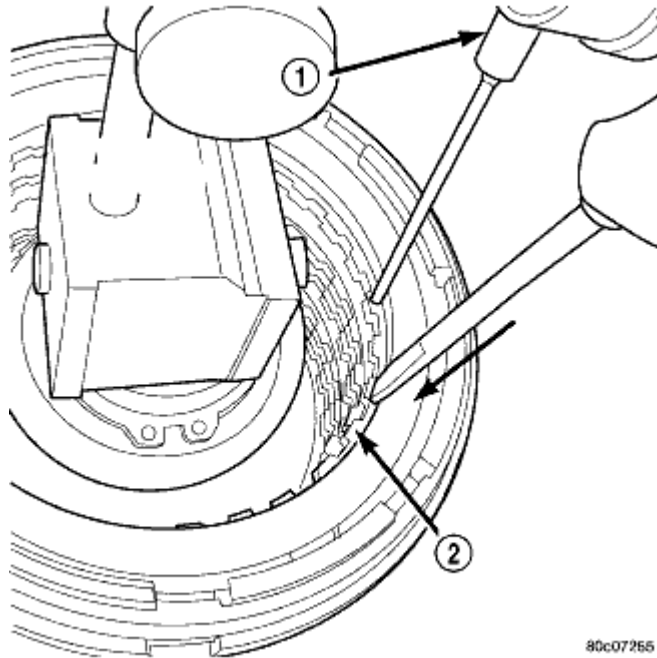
Press Down On Reverse Clutch & Zero Indicator
